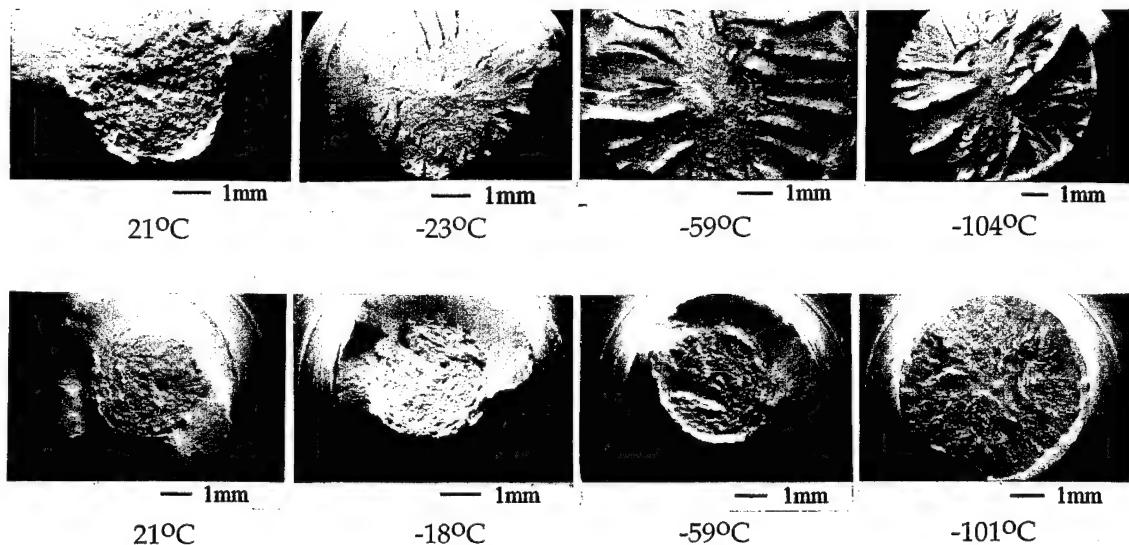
Fracture appearance of Q1N weld metal tensile specimens, plain (upper) and notched (lower).
